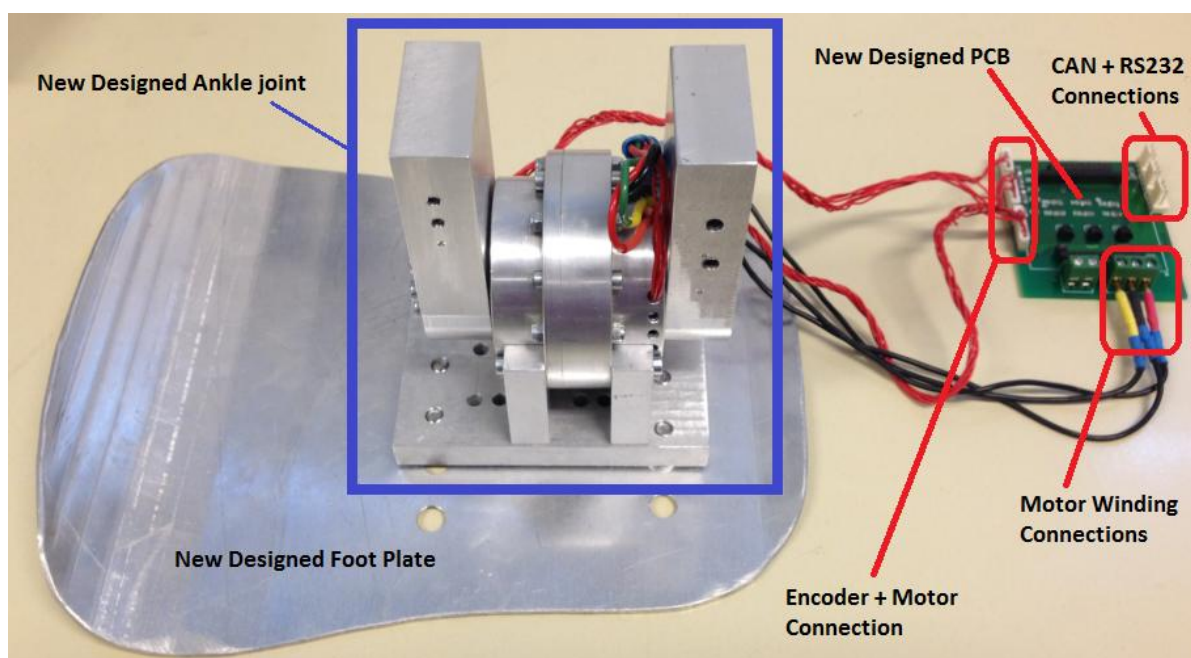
Manufactured and assembled parts of new ankle joint + new PCB connections
